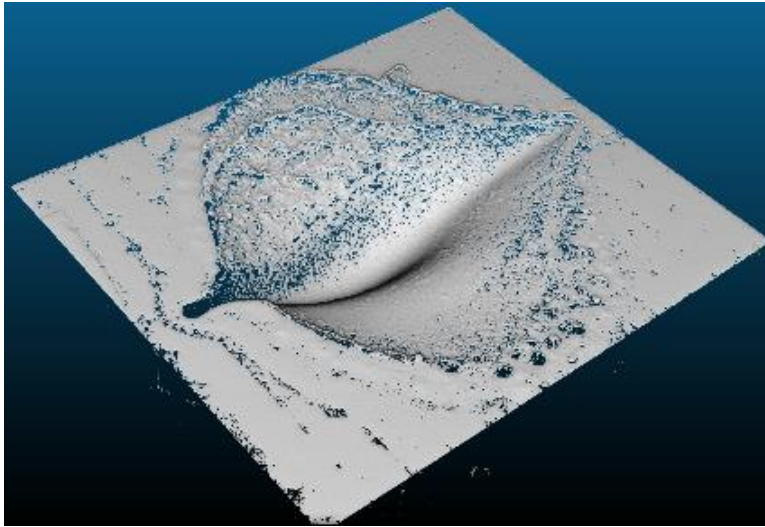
3D profile of leaf print taken 23.5mm below the cutting zone when cutting 6mm thick stainless steel at 0.72m/min (laser power 1850W and cutting gas pressure 13bar)
